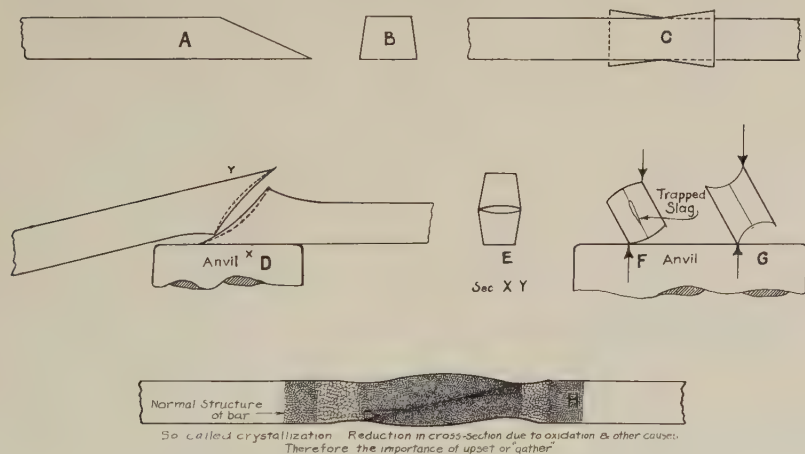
Illustrating Some of the Principal Causes of Defects in Welds.
